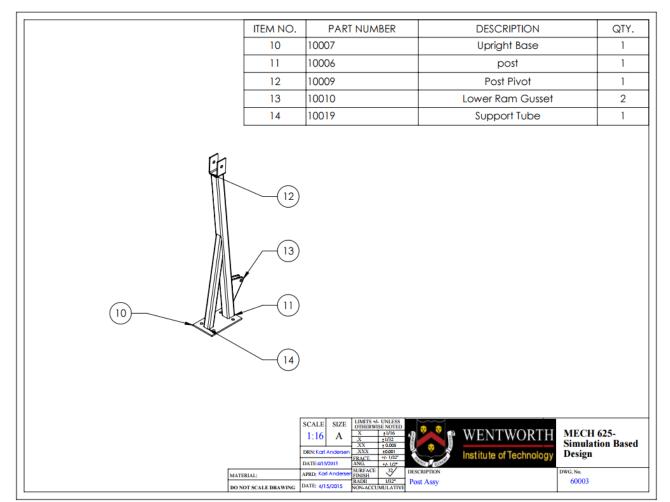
PN#60003 Post Assembly Redesign Drawing with BOM
